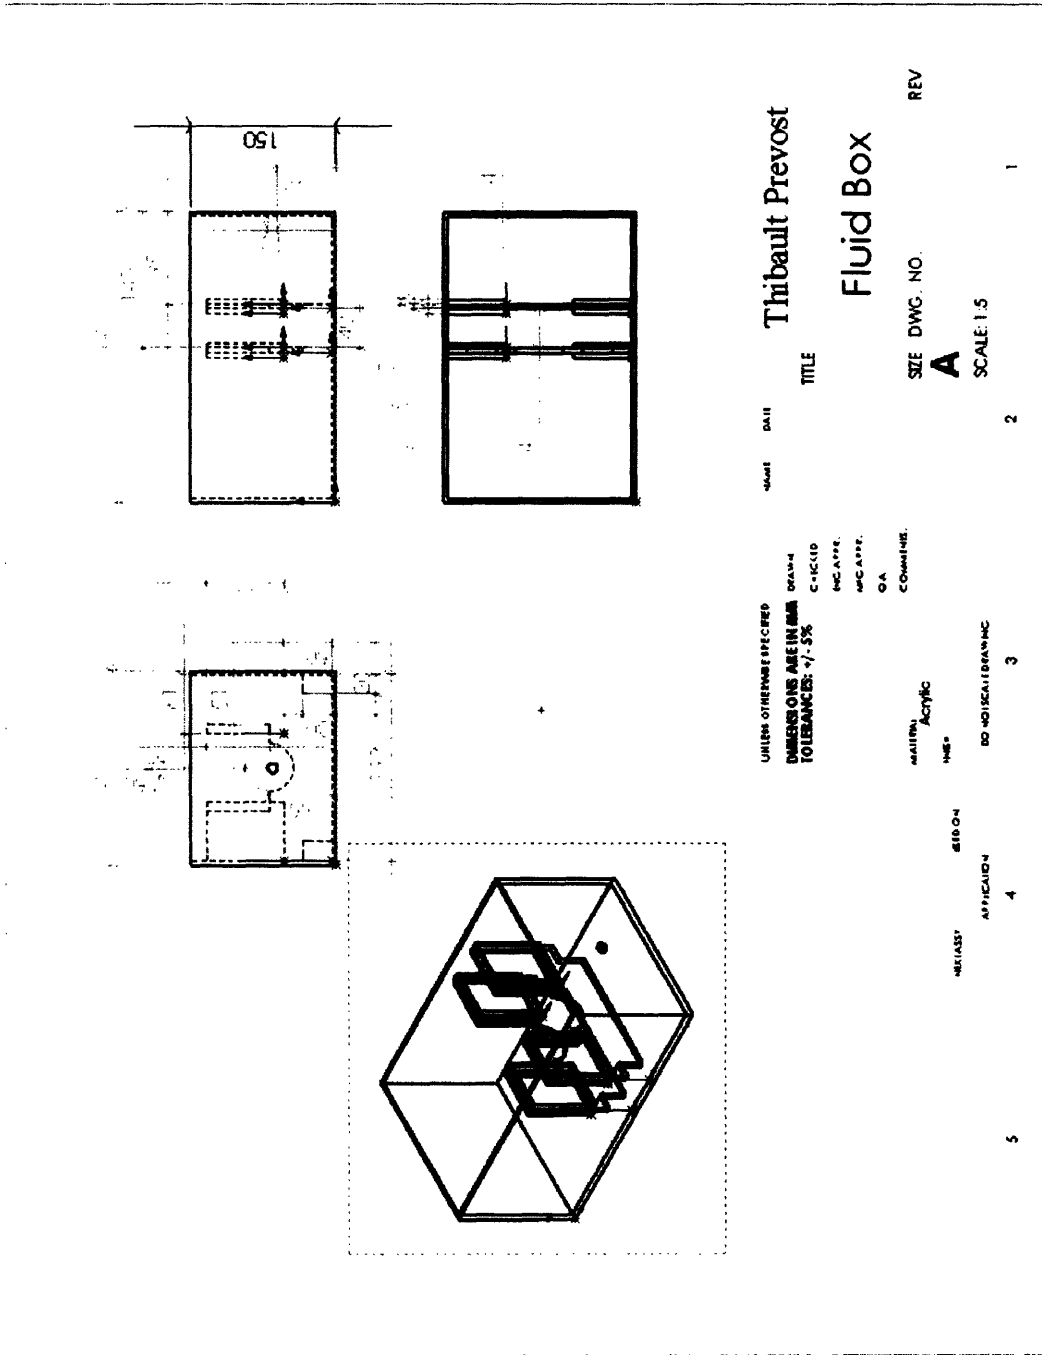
Fluid box engineering drawing (dimensions are in mm).
